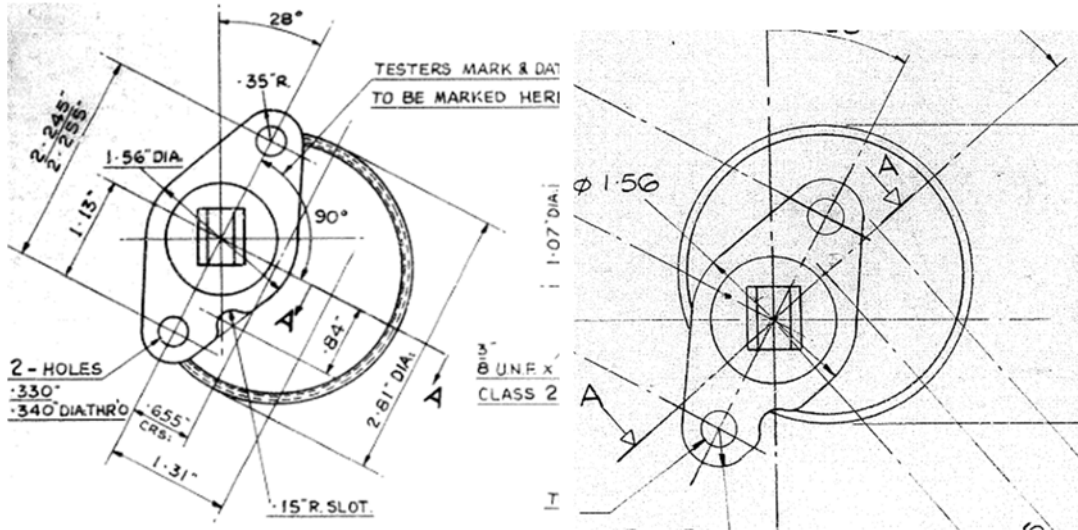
Brake 21A1237 and clutch master cylinder AAU250.
